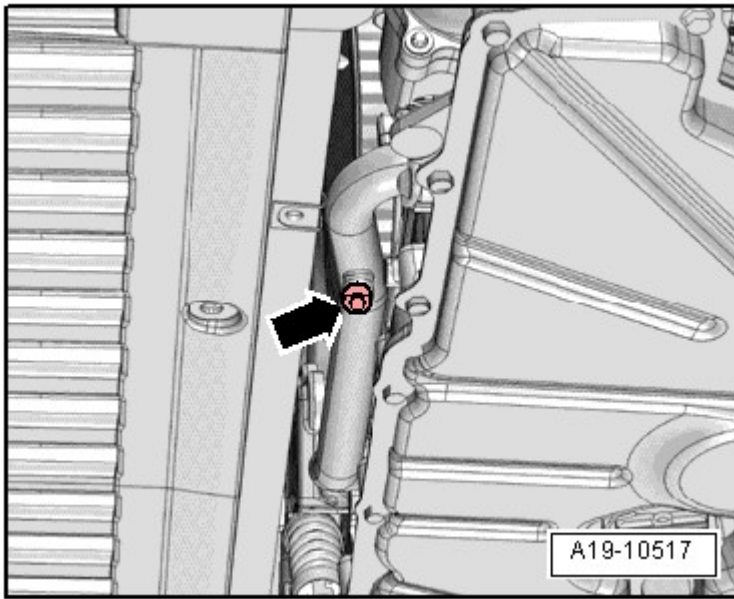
Identifying Drain Plug -Arrow- On Front Coolant Hose
